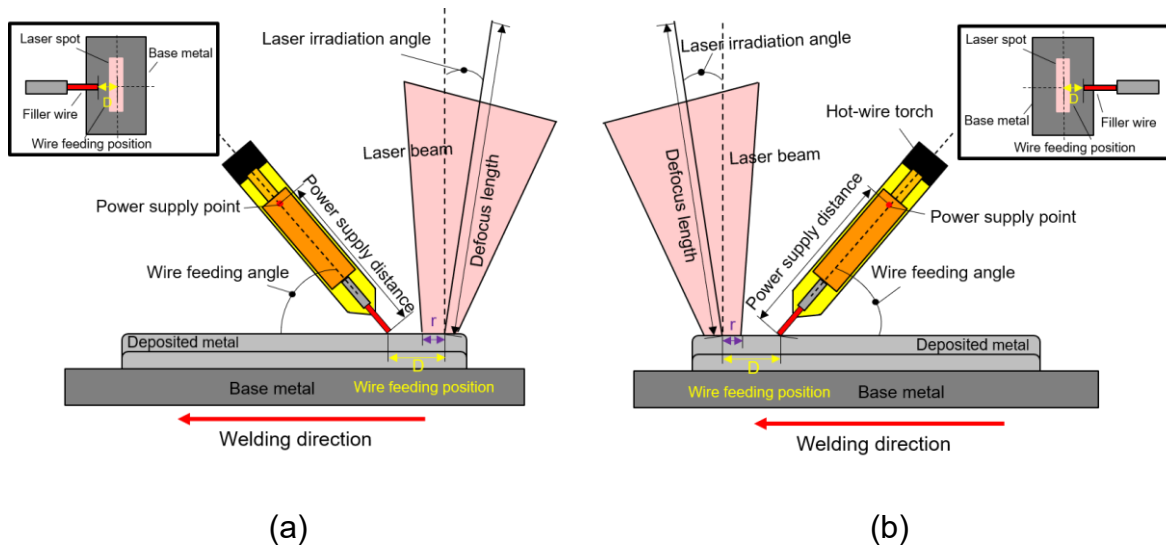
Schematic illustration for various welding directions:
